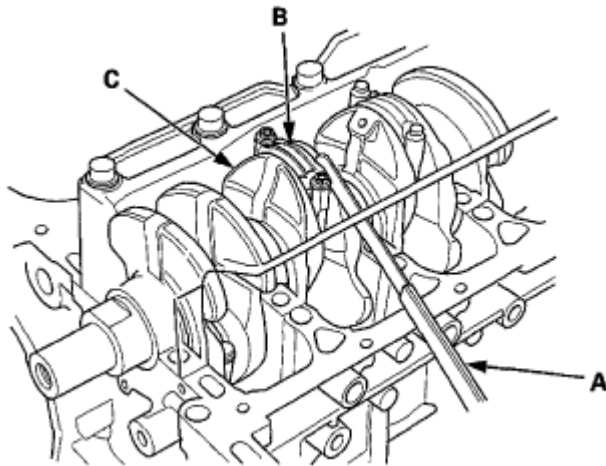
Measuring Connecting Rod End Play Between Connecting Rod And Crankshaft Using Feeler Gauge
